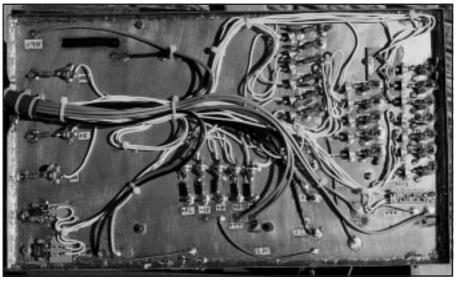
Bottom view of the RF board. Effective filters are installed at each terminal and coax cables are soldered directly to the double-sided circuit board; see the discussion in Part 2. To minimize connector troubles, the board is hard-wired to the radio; a 12-inch-long bundle of wires and cables allows the board to be easily lifted and serviced.
